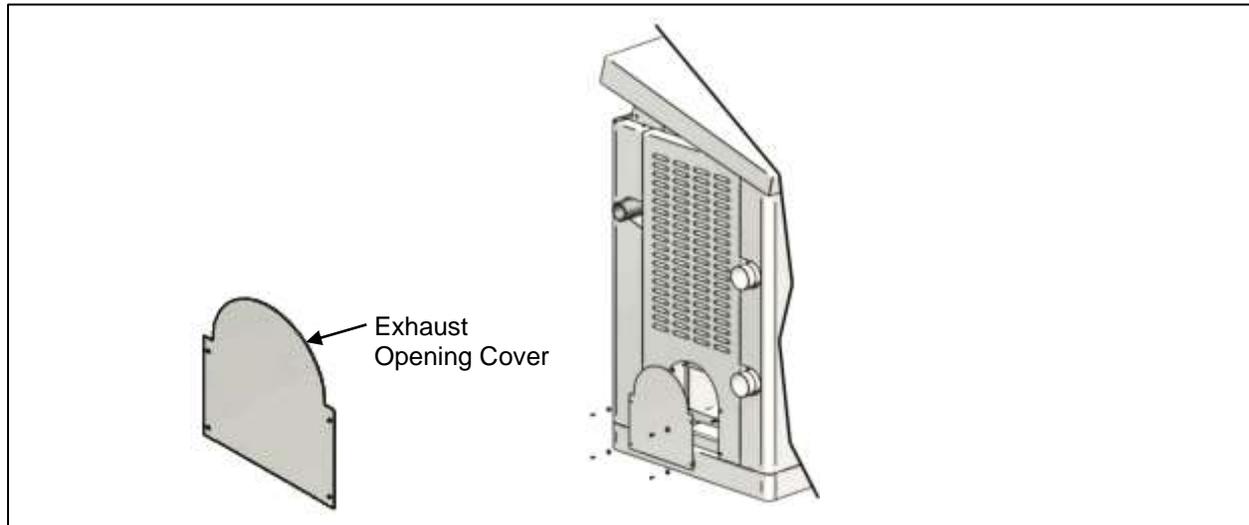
Rear Exhaust Kit for Changing Exhaust Outlet from RIGHT HAND Side to REAR
